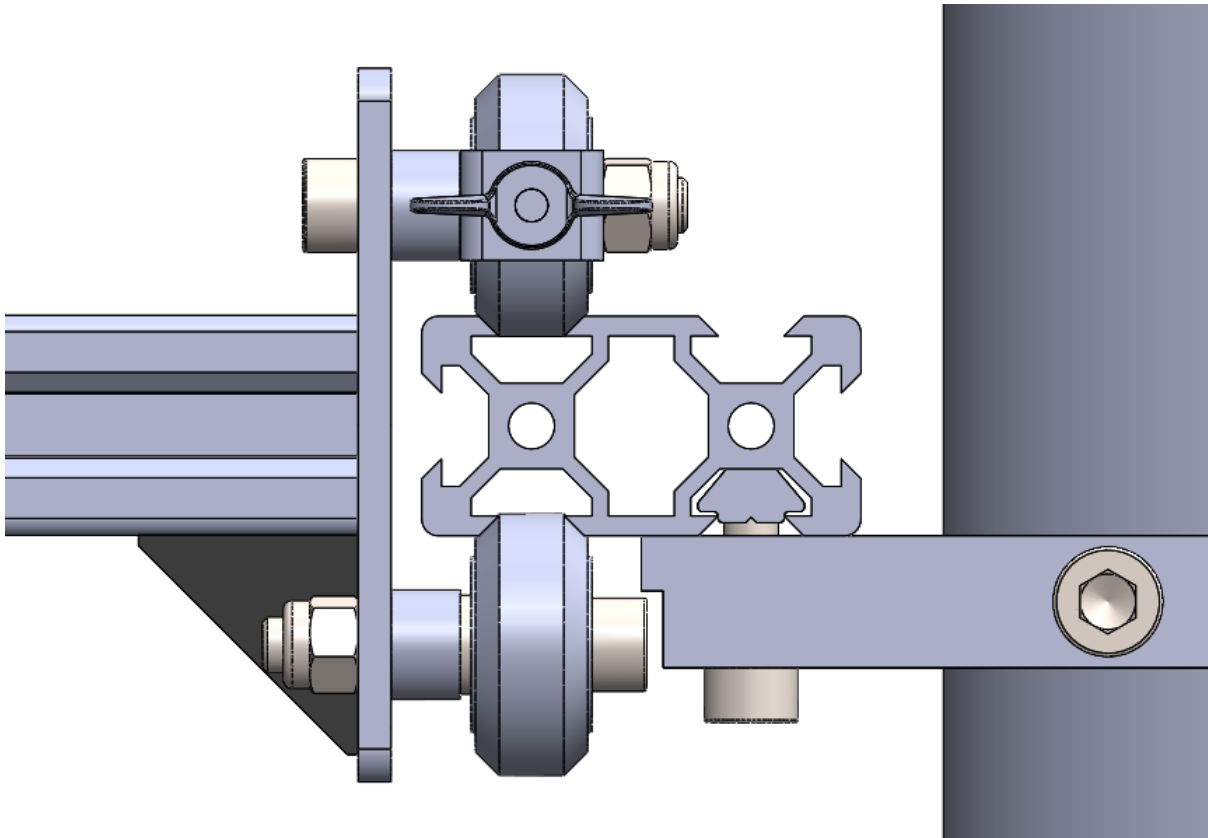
View of the clamping mechanism with rear mounted microscope
